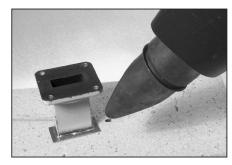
Larger assemblies may be soldered with a heat gun. A torch is better for high-temperature brazing.
